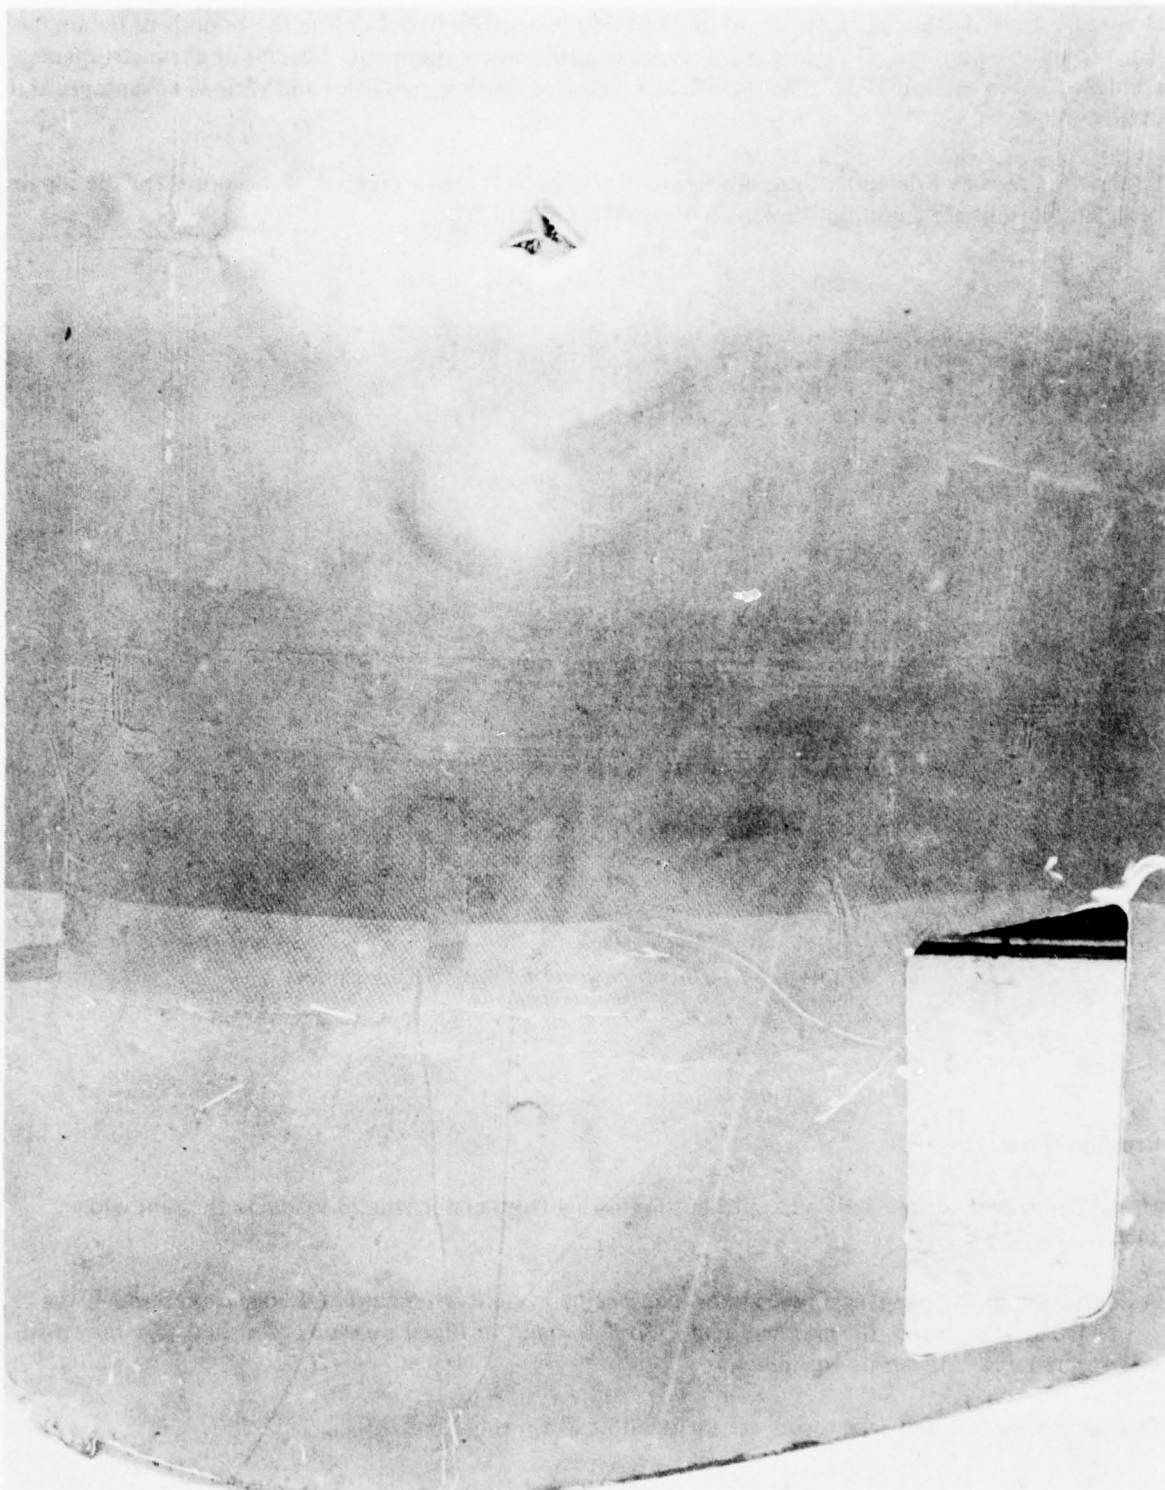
Puncture in Honeycomb C-141 APU Access Panel
